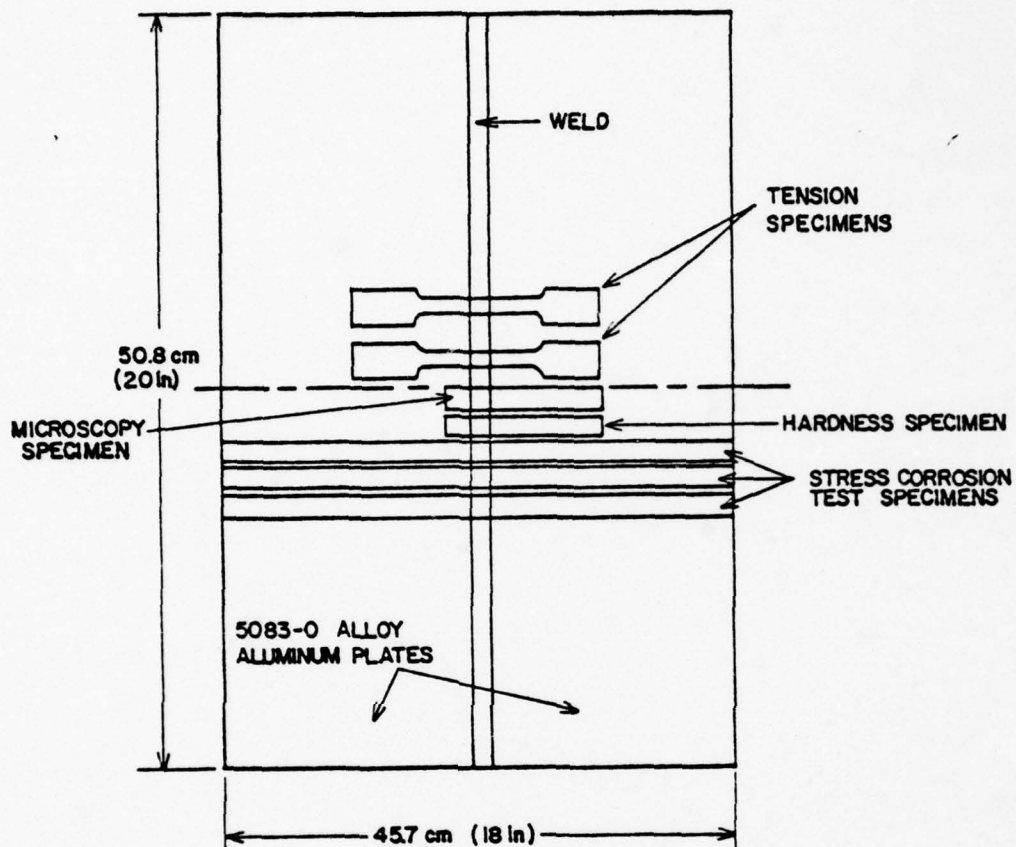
Schematic representing the areas of the welded test plates used for metallographic, mechanical, and stress corrosion testing. The specimens were taken as near the center of the test plates and as close together as possible to avoid significant differences in cooling rates between specimens.
